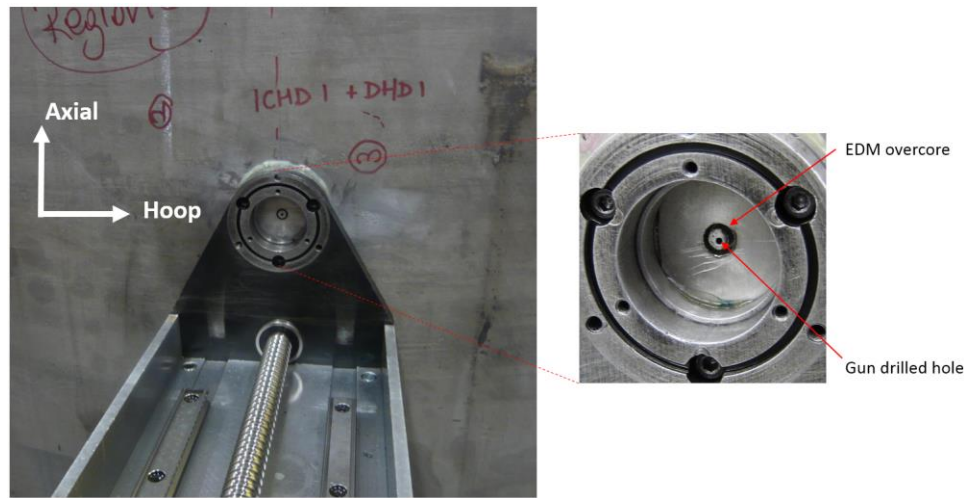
Positioning equipment used to perform DHD measurements of a base metal region (far from any weldments). The orientation of the axial and hoop stresses is indicated on the figure. In the center of the fixture, the hole and EDM over-core can be seen.
